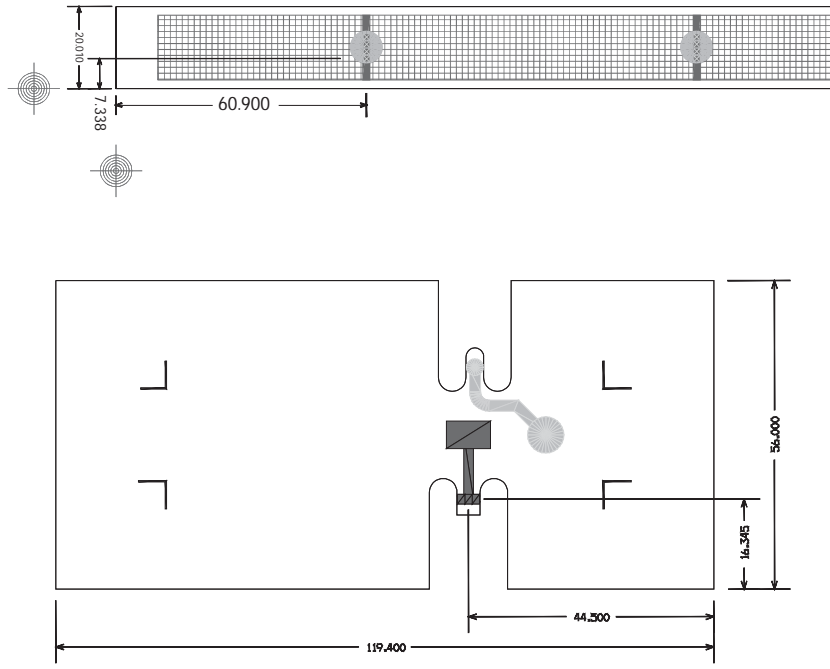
Drawing of the copper mesh cable that was embedded in the carbon fiber support structure (top); drawing of the sensor 'wrap-around' flex circuit (bottom).
